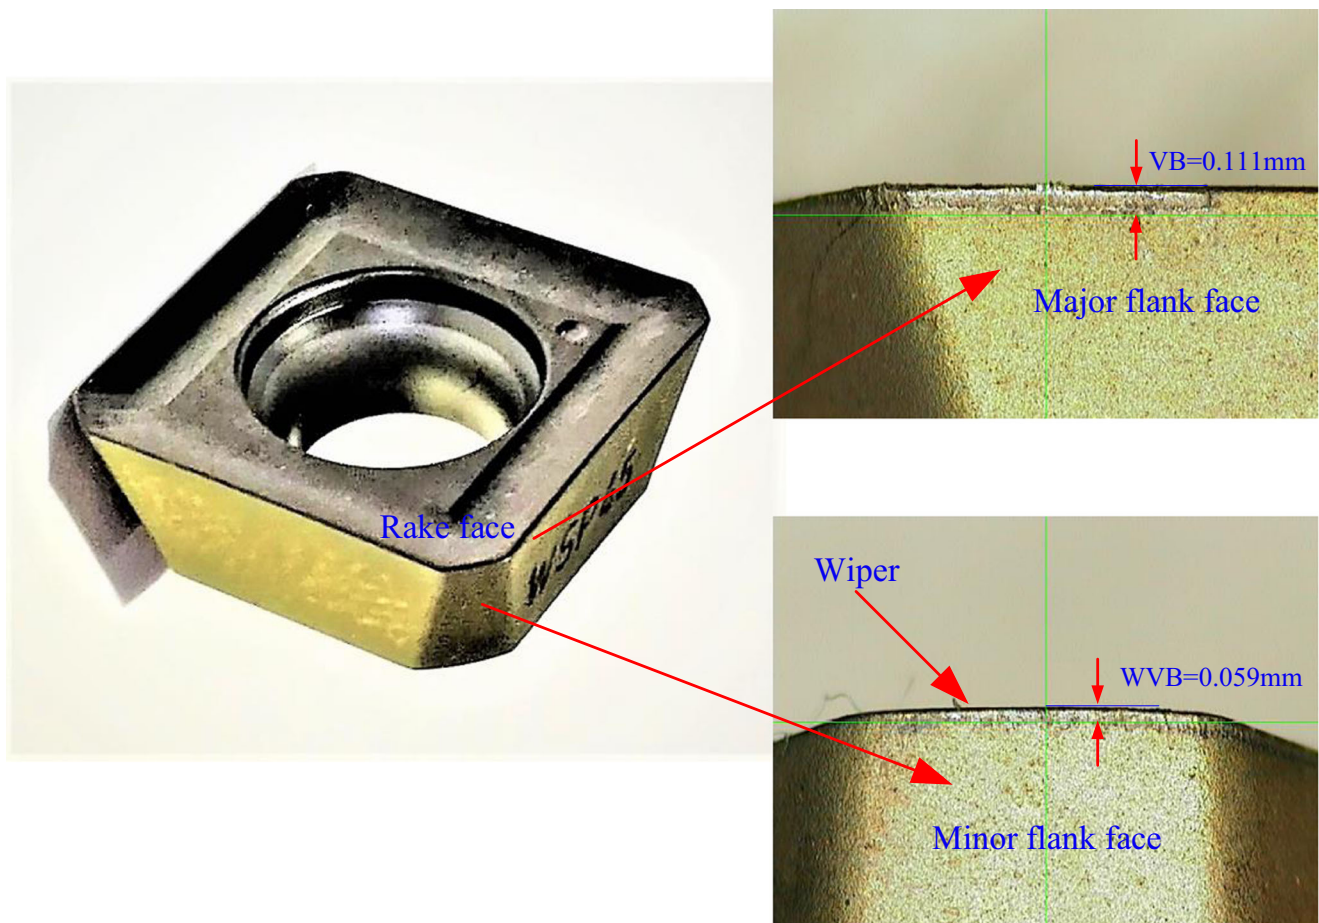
Tool wear on major and minor flank face of tool C after run no. 3
